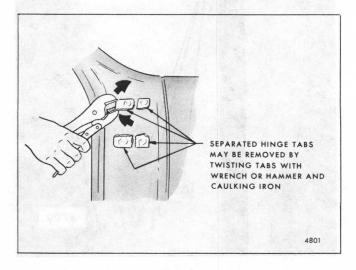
Body Side Door Hinge Strap Removal - "H" Styles
